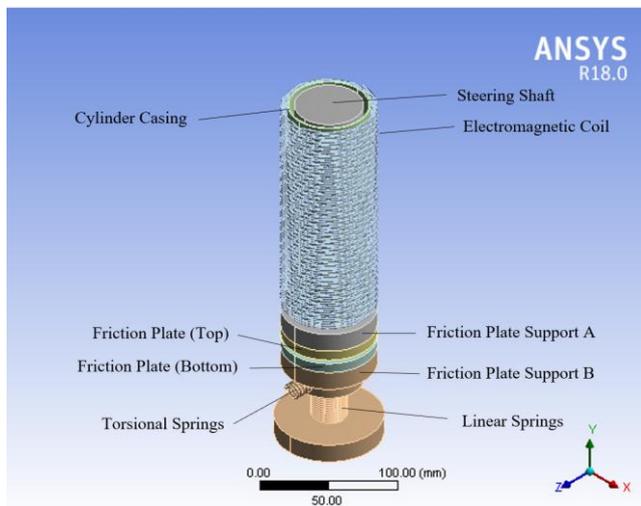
Complete Design of Steering Damper System (Isometric View)
